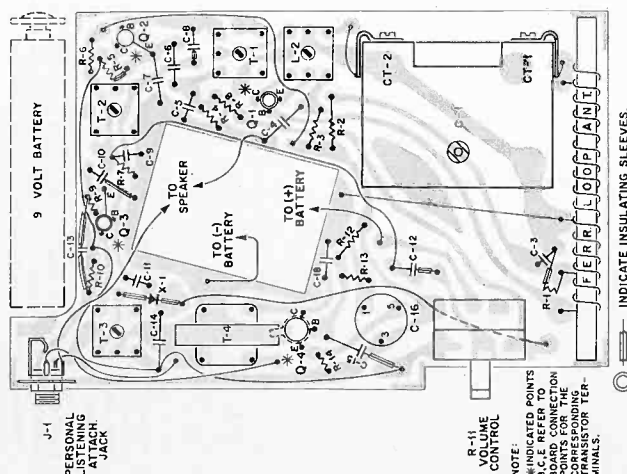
PRINTED CIRCUIT CHASSIS DIAGRAM (TOP VIEW)
